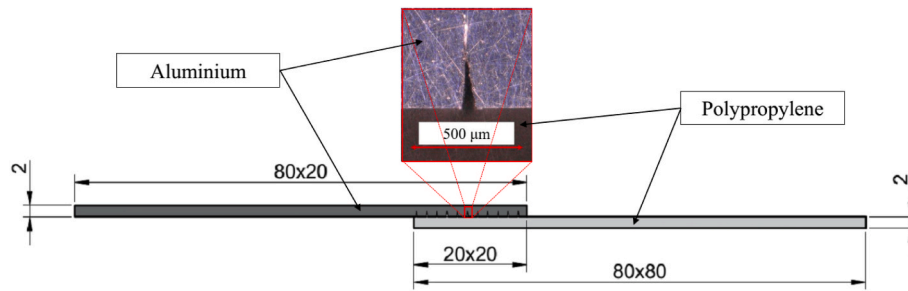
Arrangement of aluminium and polymer specimens prior to joining, and the shape of grooves manufactured with laser engraving.
